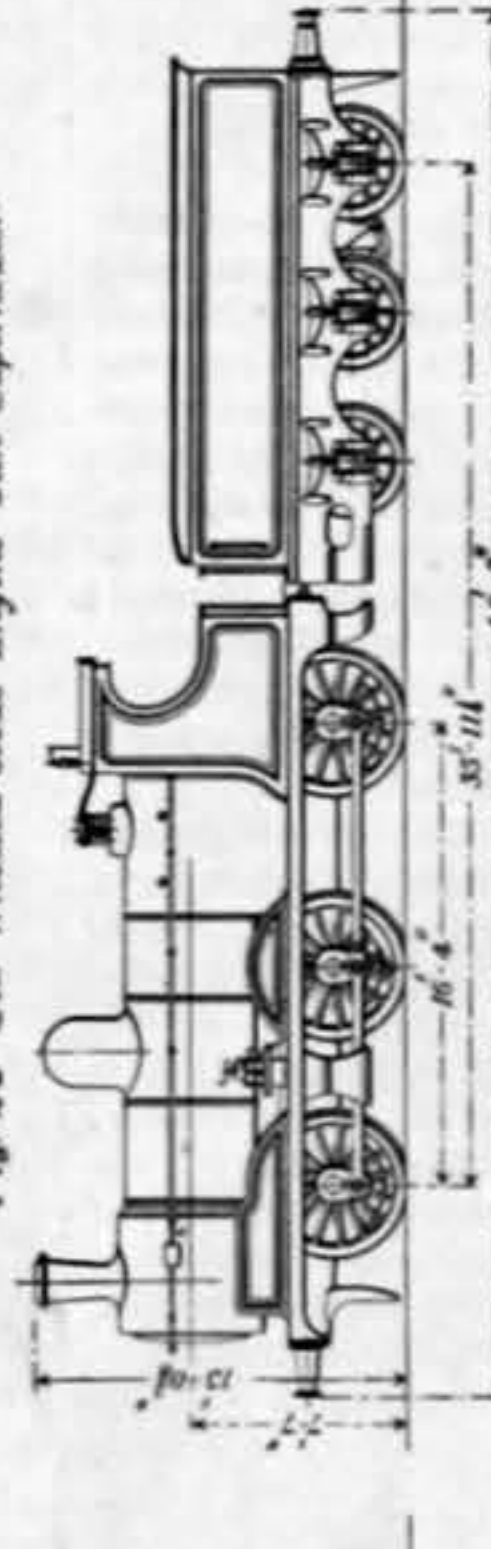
Four Cylinder, Ten Wheeled Passenger and Fast Goods Engine.
